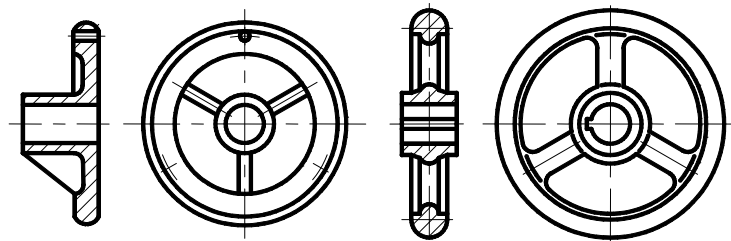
Sectioning a flange    Figure 3.32 Sectioning a flywheel
